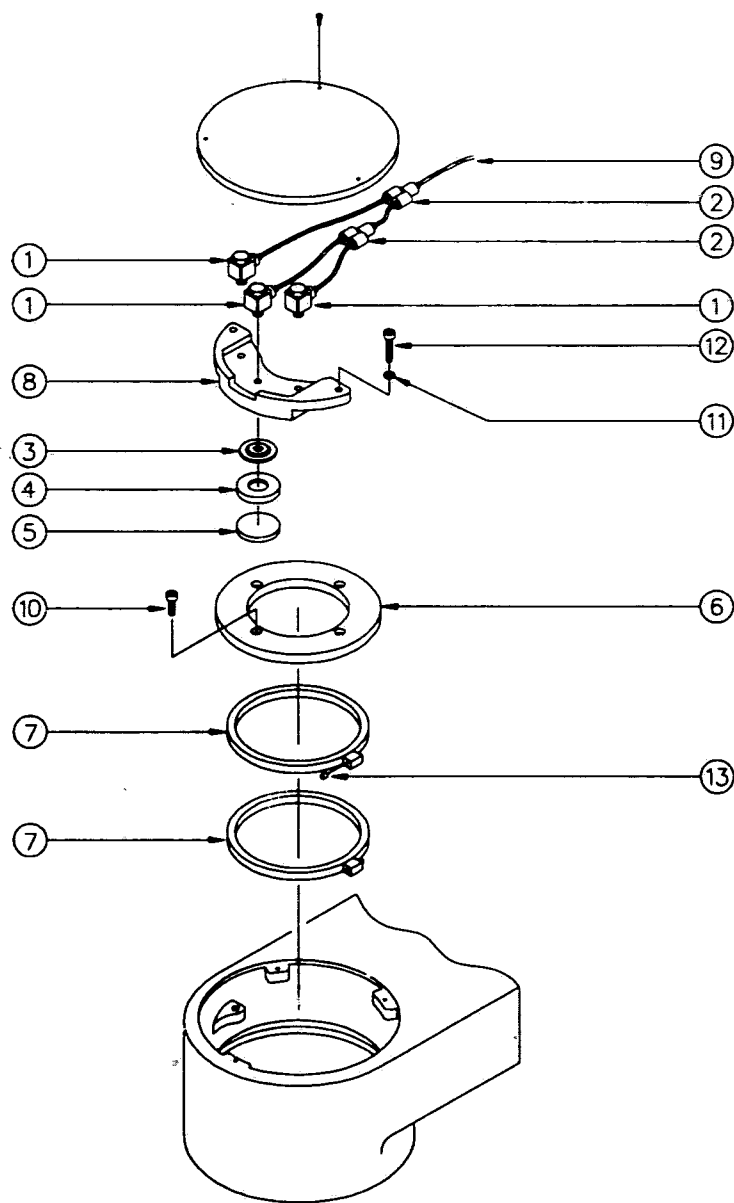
Rotational Stop and Air Brake Assembly, Upper Suspension Arm
